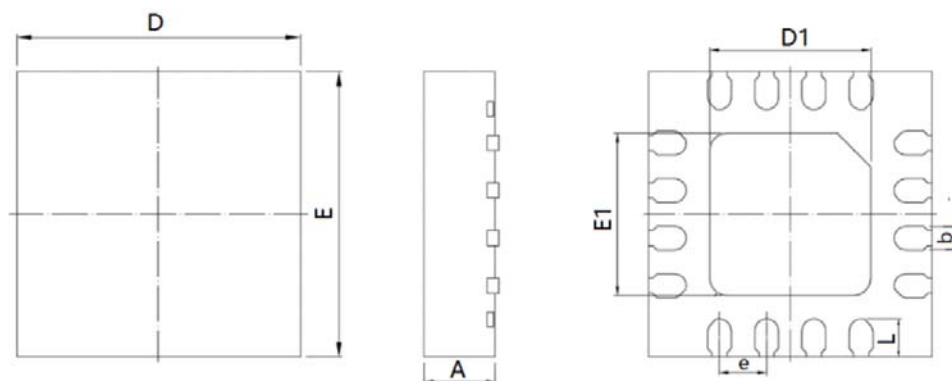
Plastic-encapsulated QFN-16 package dimensions
